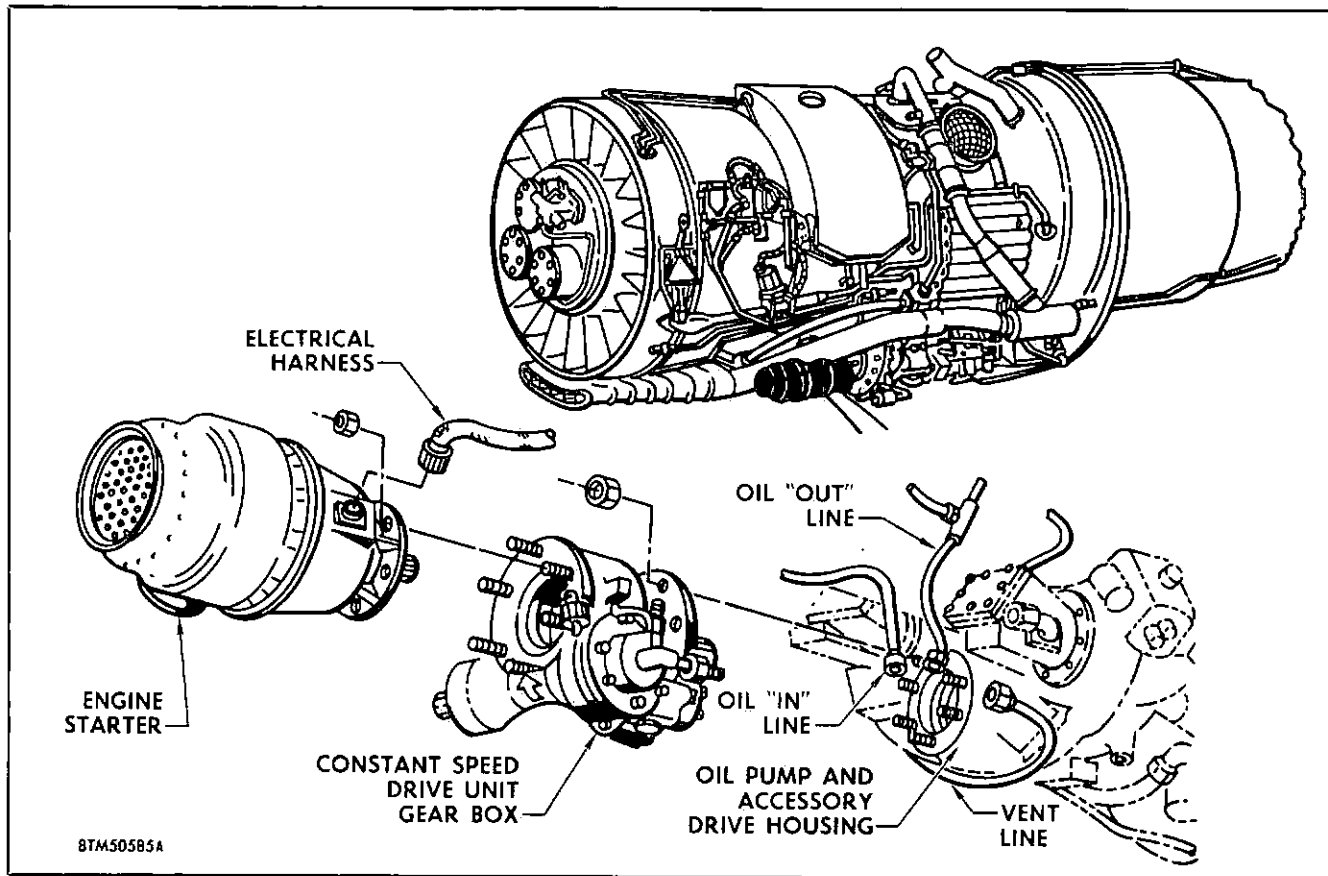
Sundstrand Gear Box and Engine Starter Installation
